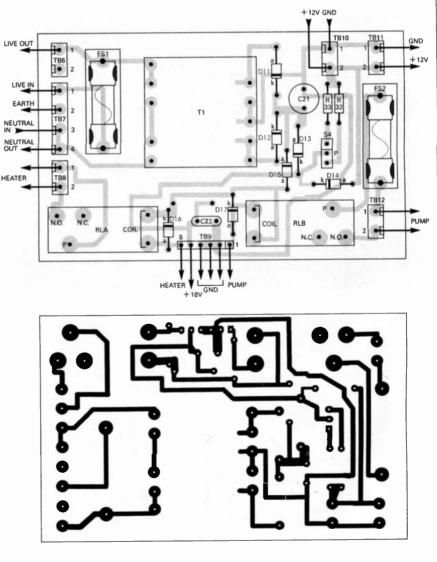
Power supply printed circuit board component layout, wiring details and full size copper foil track master. The completed p.s.u. is shown at the top.
